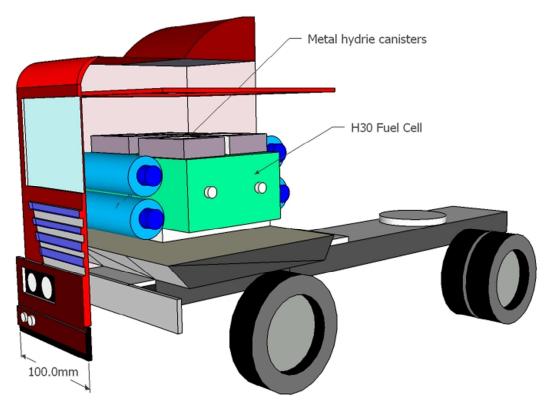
Layout of fuel cell power system in small-scale model truck (horizontal canisters layout)
